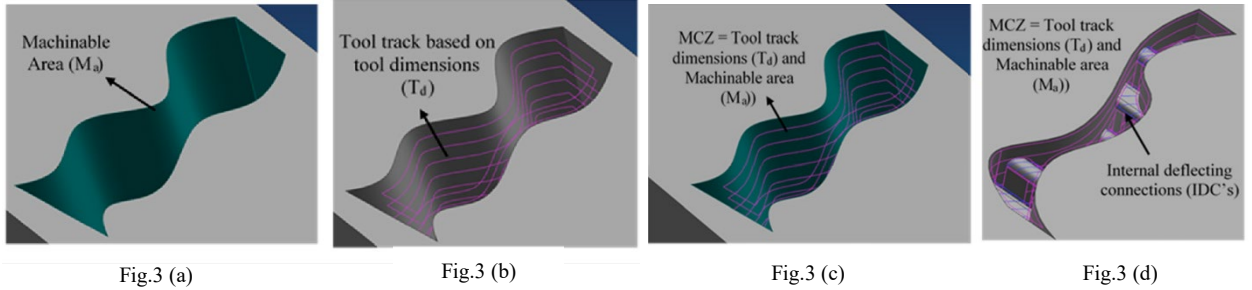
(a) Machinable Area (M_a); (b) Tool track based on tool dimensions (T_d); (c) Main Computable zone (MCZ) showing both M_a and T_d ; (d) Internal Deflecting Connections (IDC's)
